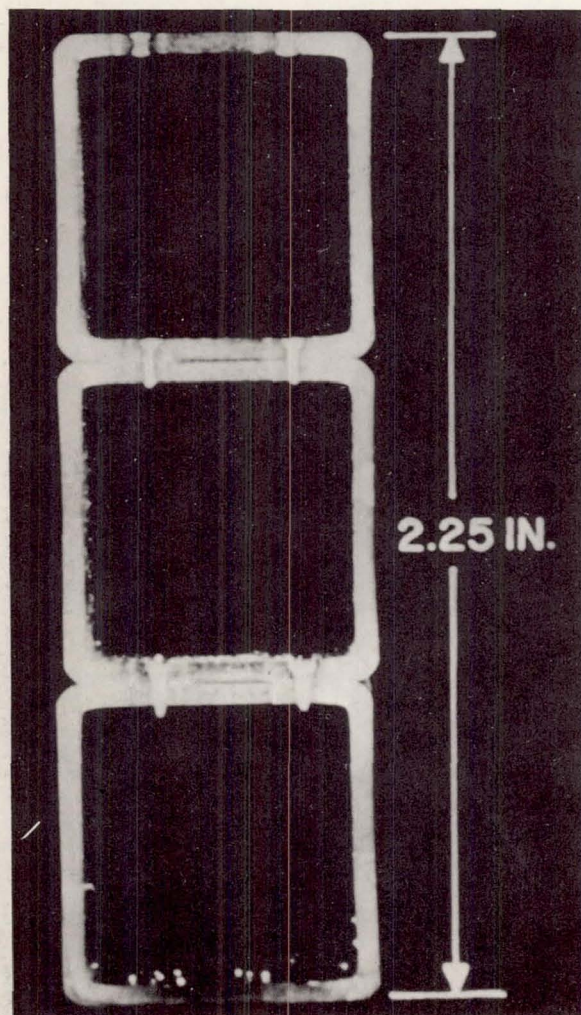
Multiple tier weld in 18-8 stainless steel. (Courtesy Hamilton Standard Div., United Aircraft Corp.)
